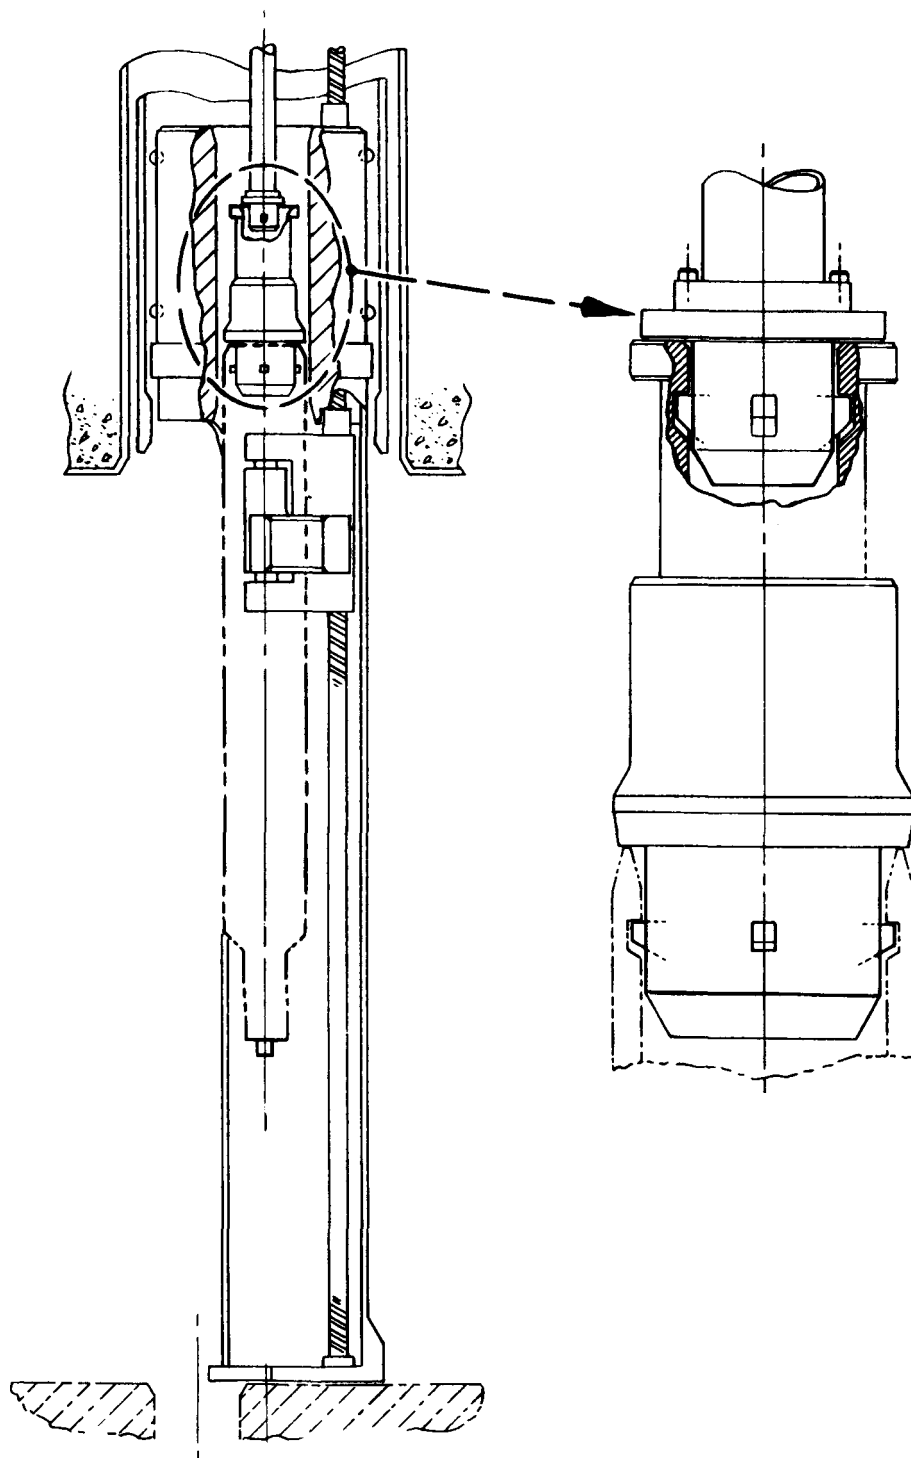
Fuel transfer cask and fuel handling machine with grapples engaged
